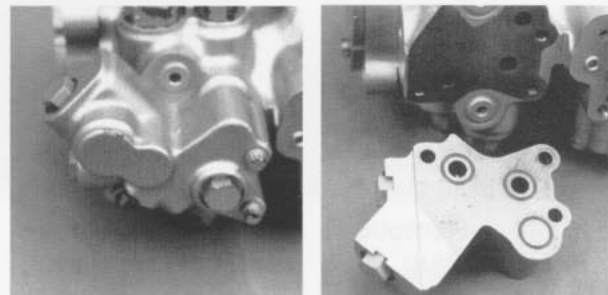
Filter Adapter and O-Rings (Earlier Production)
